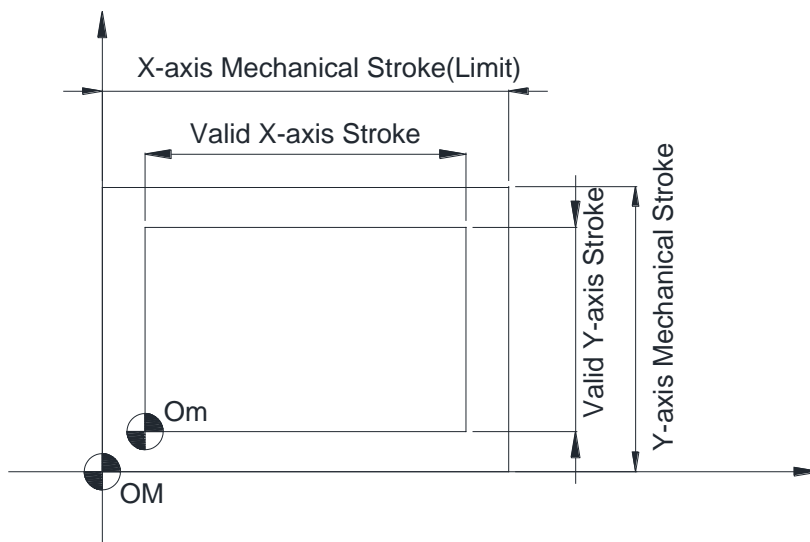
Machine Origin OM and Machine Reference Point Om
